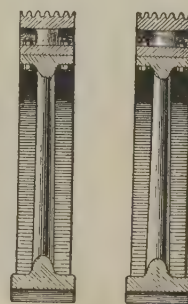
SECTIONS OF DRUMS WITH REMOVABLE RIMS.
